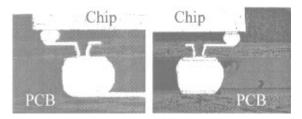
Cross sections showing the solder bump, copper VIP, and solder joint.
